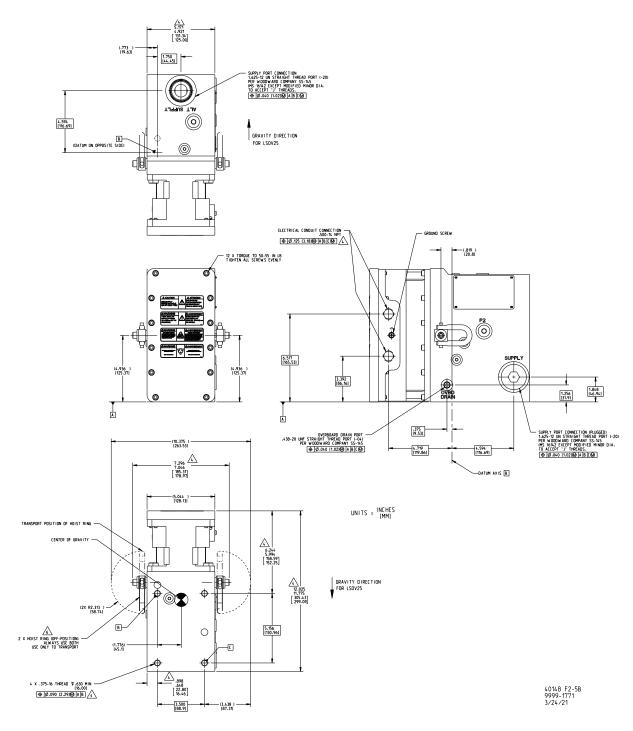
Outline Drawing LSOV25, Stainless Steel, 24 VDC, with Single Proximity Switch
